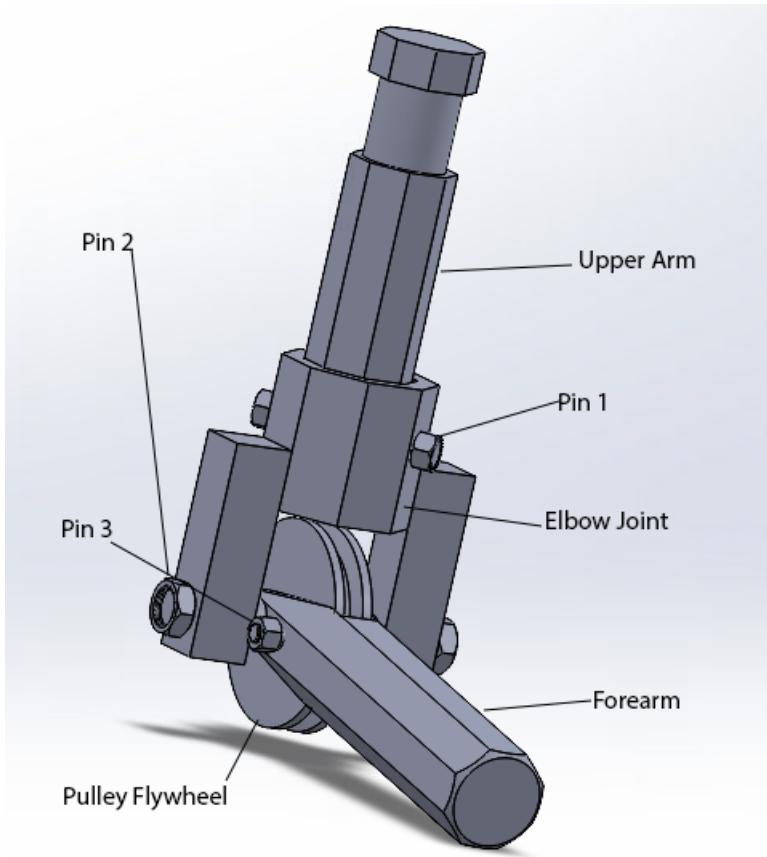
Shows the 3D Computer Assisted Design of the one DOF robotic arm in Solidworks
